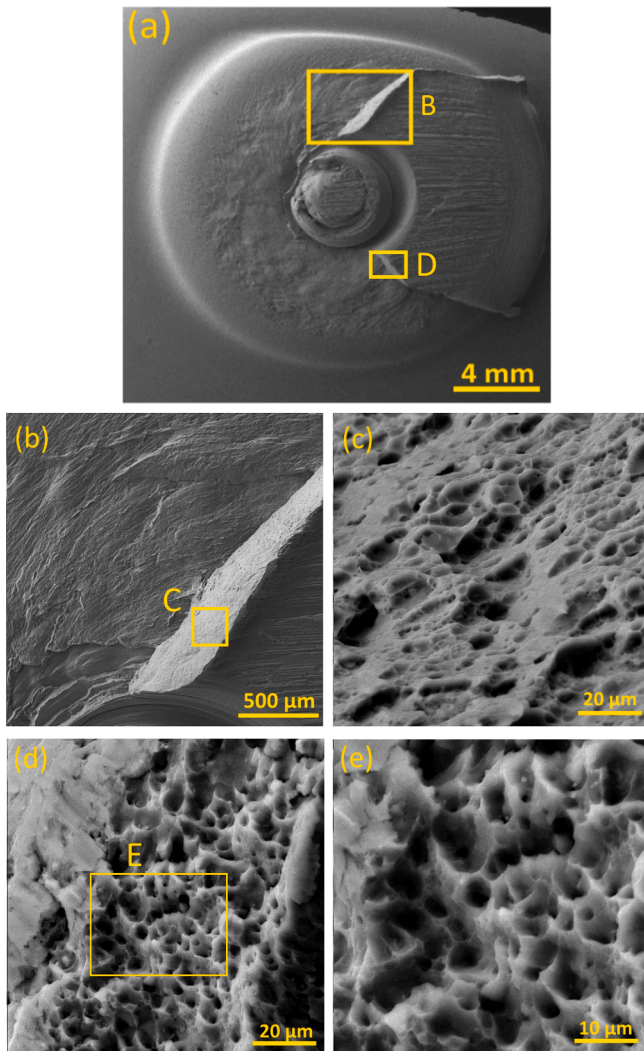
Fracture SEM-SE images of AA5754-O/AA2024-T3 weld (AA2024 side).
